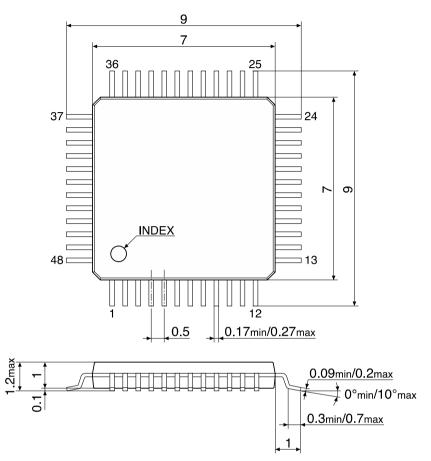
TQFP12-48PIN (P-TQFP048-0707-0.50) Package Dimensions
